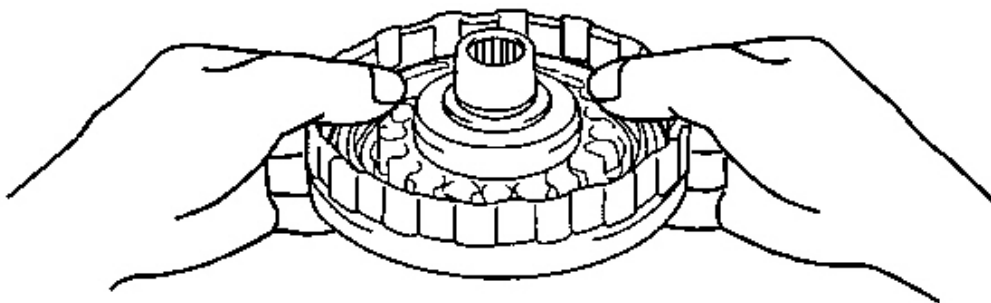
Direct Clutch Drum & Direct Clutch Piston
